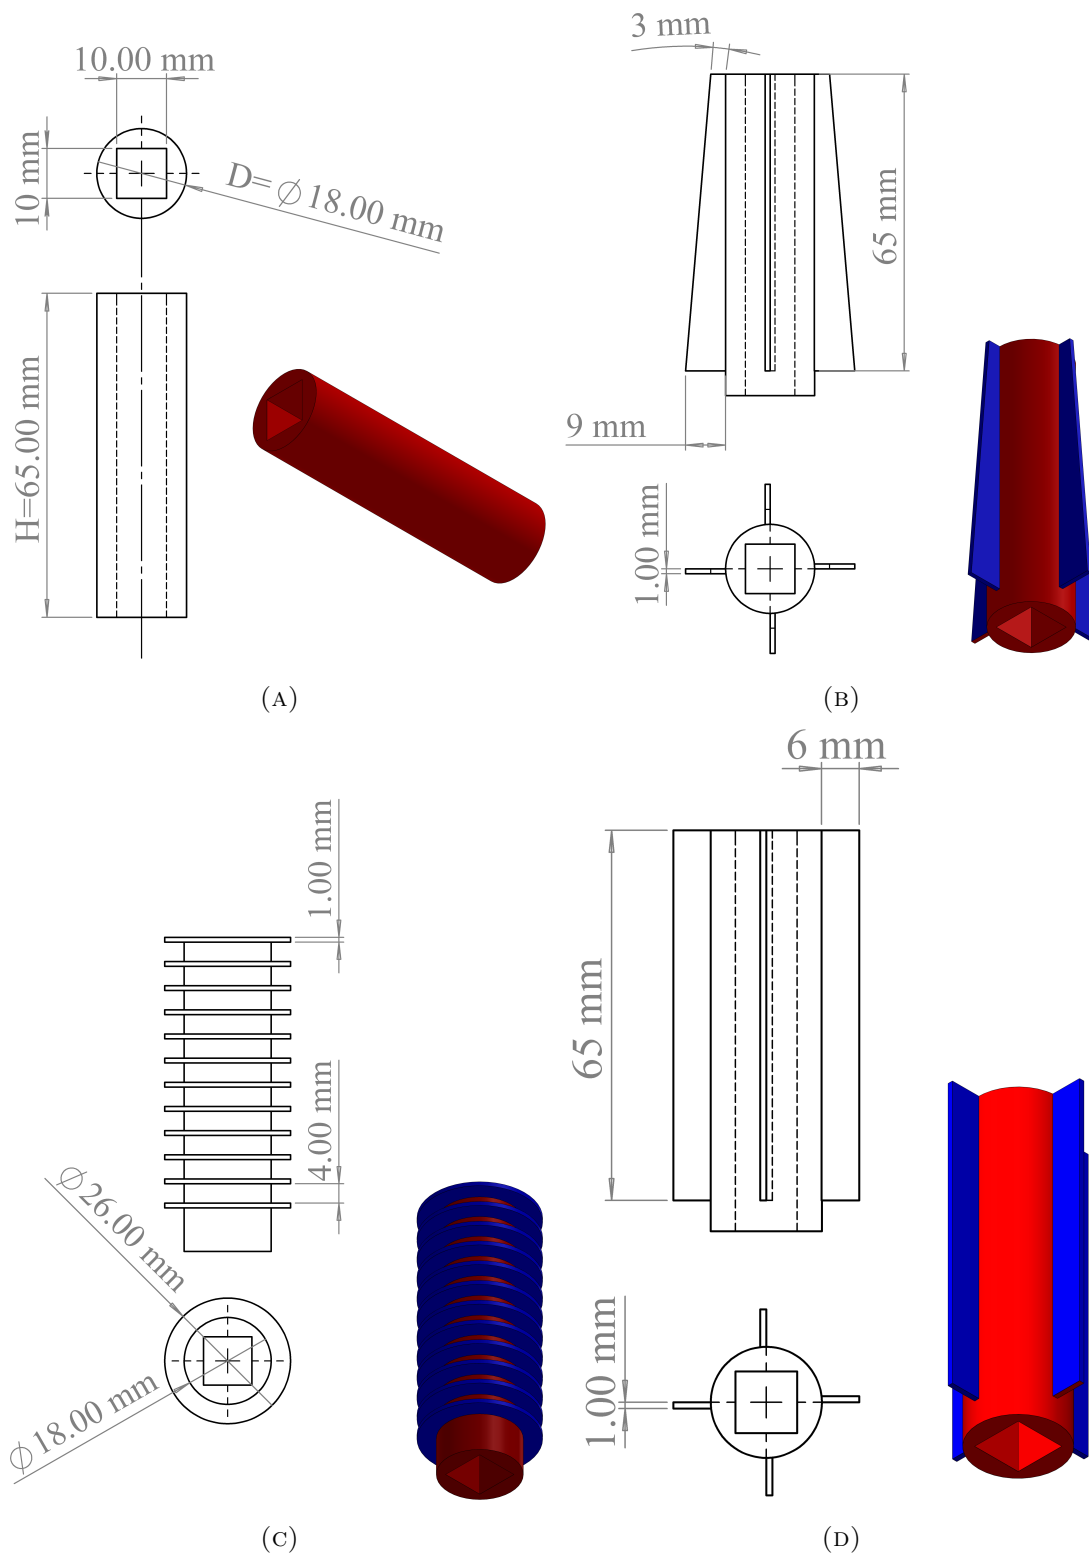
Detailed dimensions of the used fins: (A) the unfinned case; (B) taper fins; (C); circular fins; (D) rectangular fins [57].
